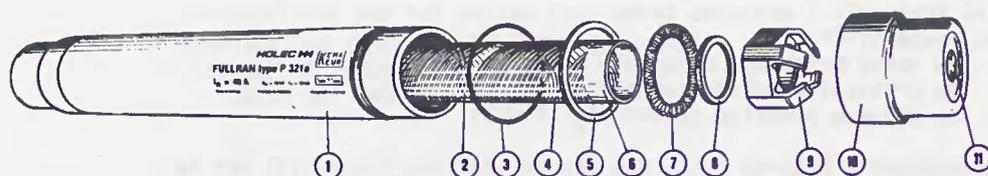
Exploded view of a FULLRAN H.V. fuse-link.
